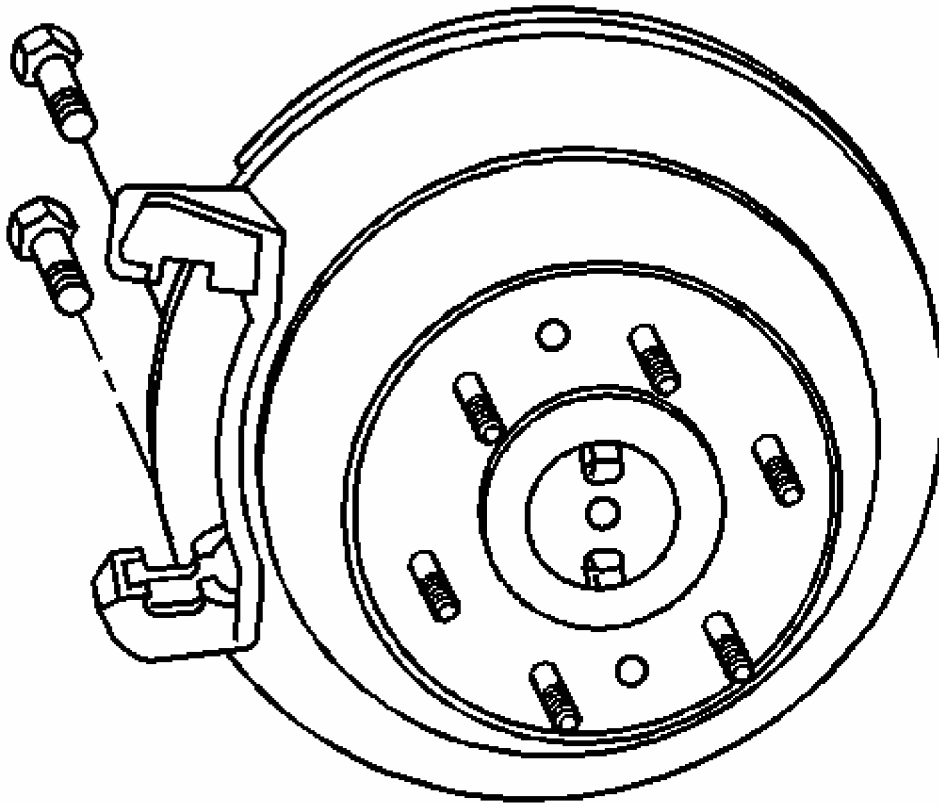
View Of Rear Brake Caliper Bracket Mounting Bolts
